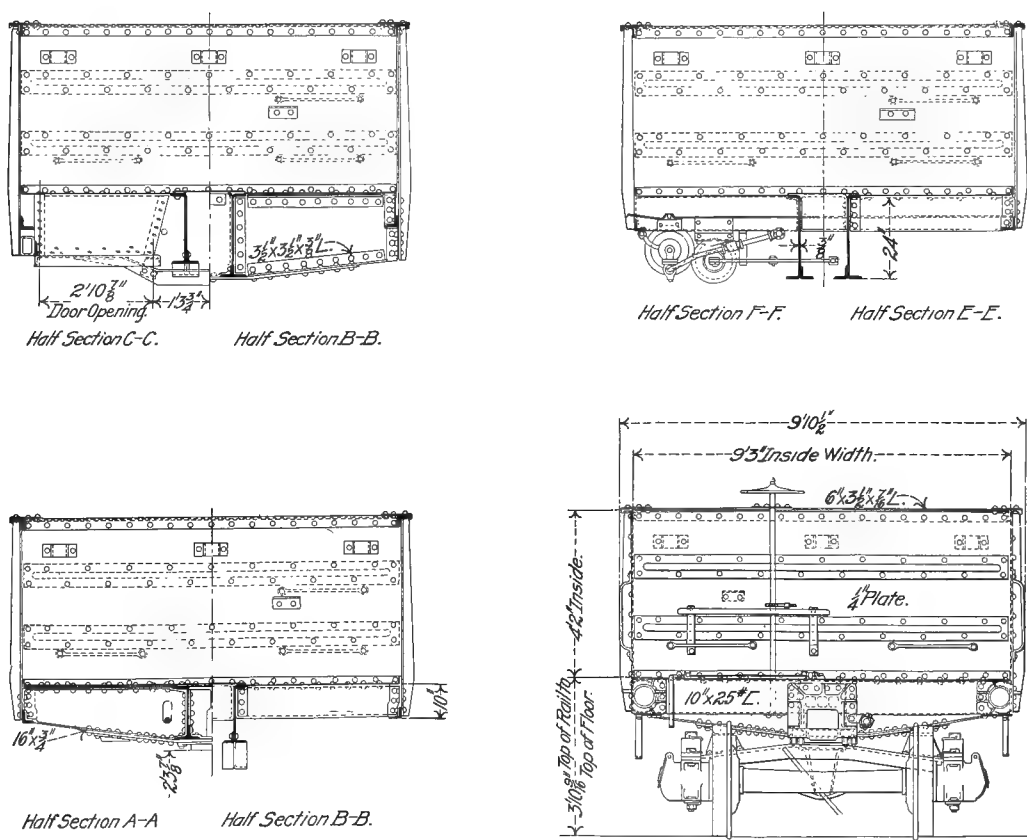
End Elevation and Cross Sections of Baltimore & Ohio All-Steel 50-Ton Capacity Hopper Bottom Gondola Car Shown in Fig. 327.
